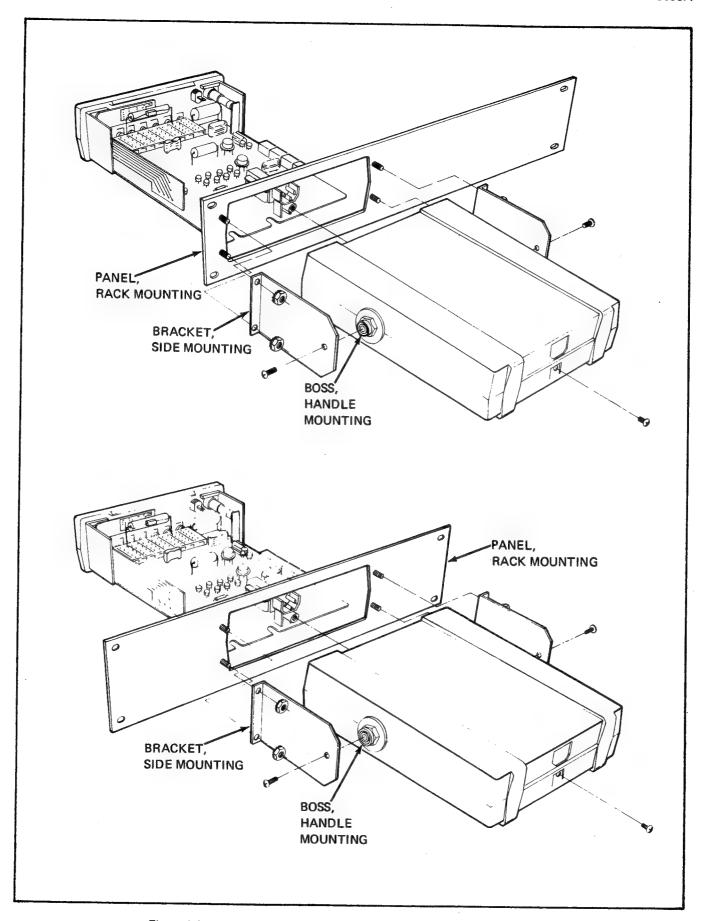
RACK MOUNTING KITS, OFFSET AND CENTER MOUNTING
